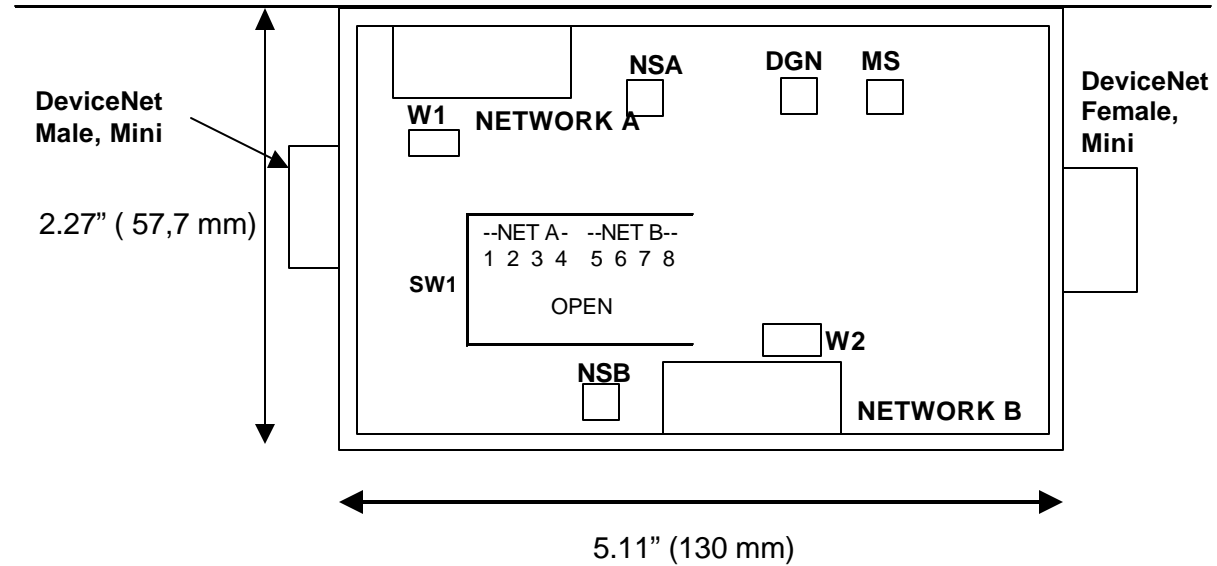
WRC-CANX-NEM Series 3 Dimensional Drawing
